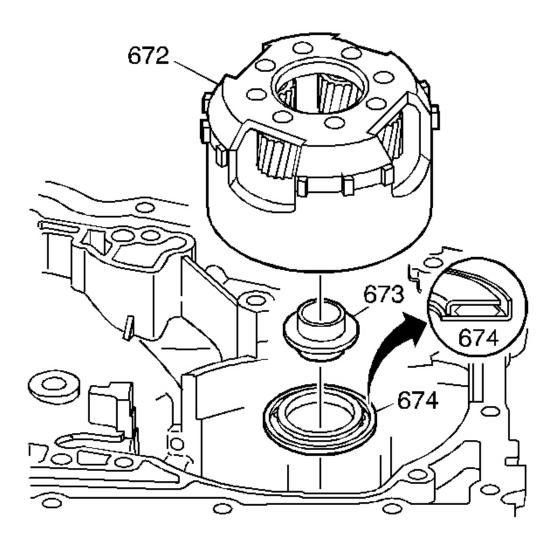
Installing Input/Reaction Carrier Thrust Bearing Courtesy of GENERAL MOTORS CORP.
